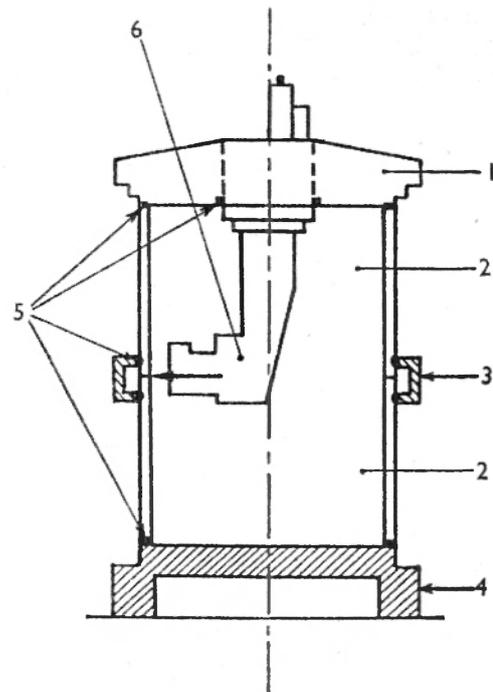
Principle and view of equipment for EB welding 3m diameter shells. 1—top plate; 2—shell to be welded; 3—counter chamber; 4—base plate; 5—seals; 6—EB gun. (Courtesy of Sciaky)
